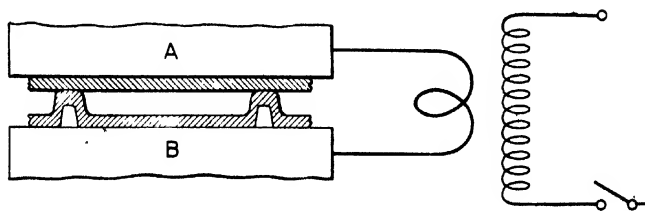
ILLUSTRATING THE PRINCIPLES OF SHEET-METAL PROJECTION WELDING
